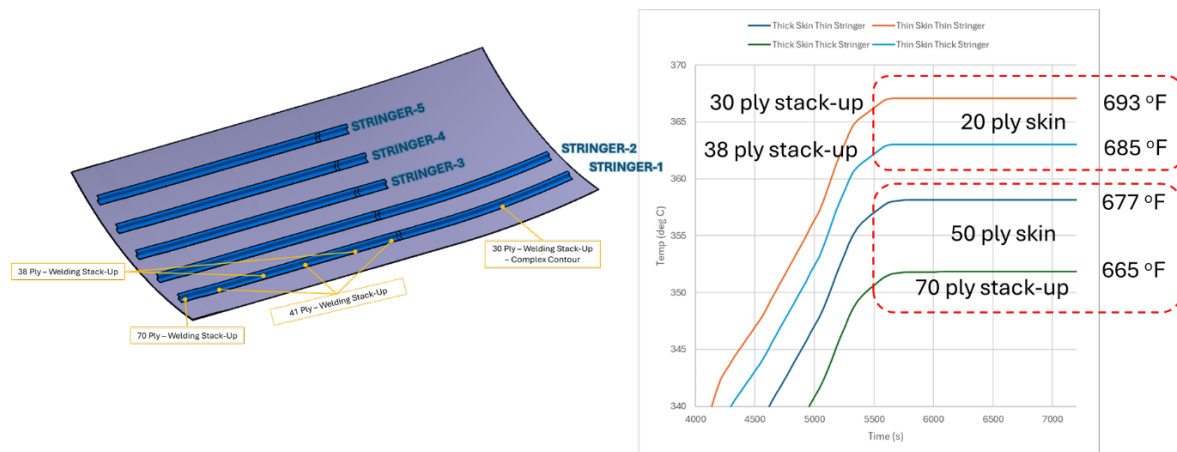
Surface temperature for different welding stack-up thicknesses
